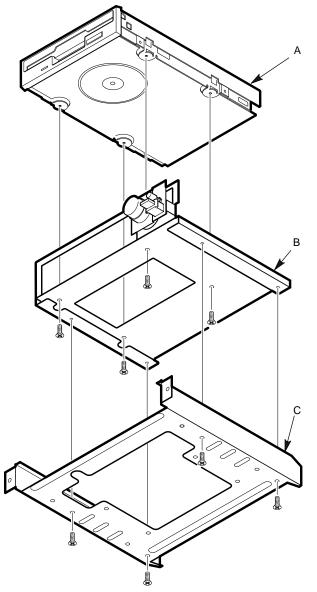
RX23 3.5-Inch Diskette Drive Removal (Part 2 of 2)
